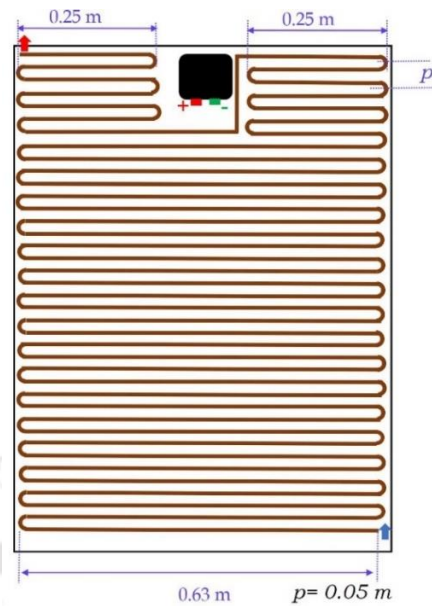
Dimensions of horizontal oscillating (M4) tube assembly (M3)
